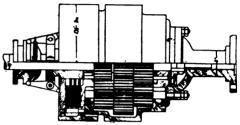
American truck planetary speed change. Note spring-pushed grey iron all packing rings, and the fiber faced steel plate multiple friction disks. The dimensions given enable the student to scale this drawing.
